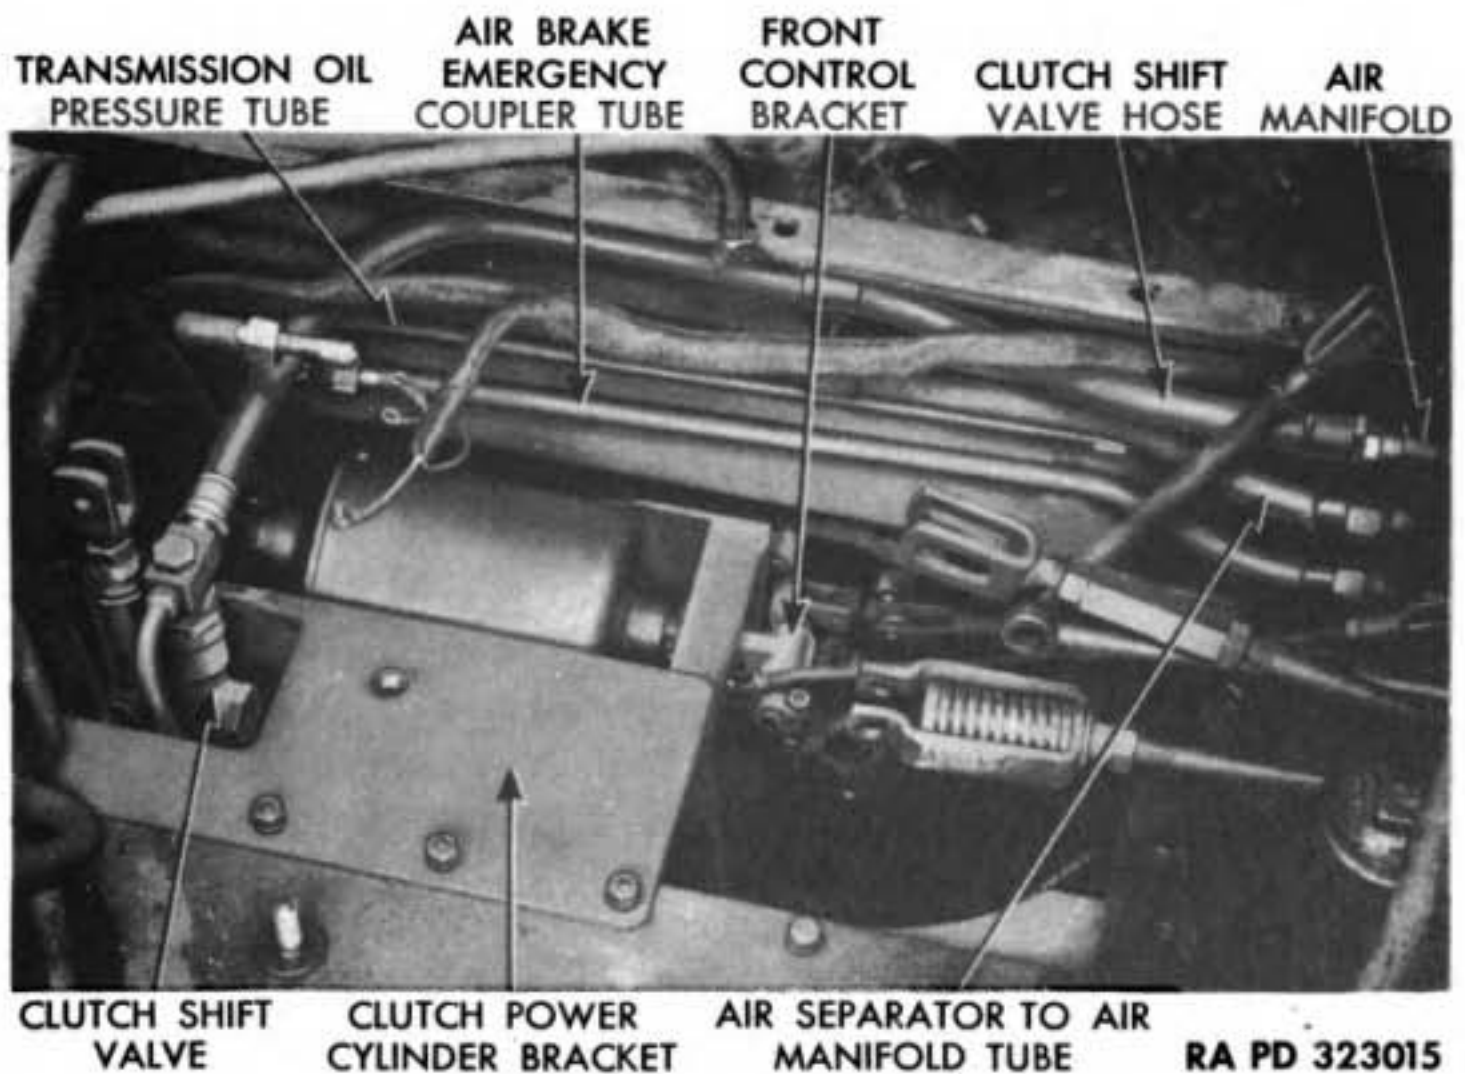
Top and Rear View of Transmission with Sea and Shell Box Removed
